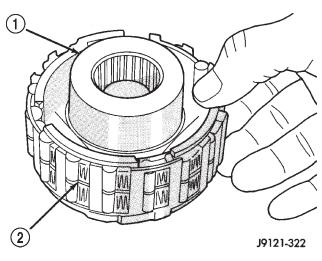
Assembling Overrunning Clutch And Hub 1 – CLUTCH HUB
